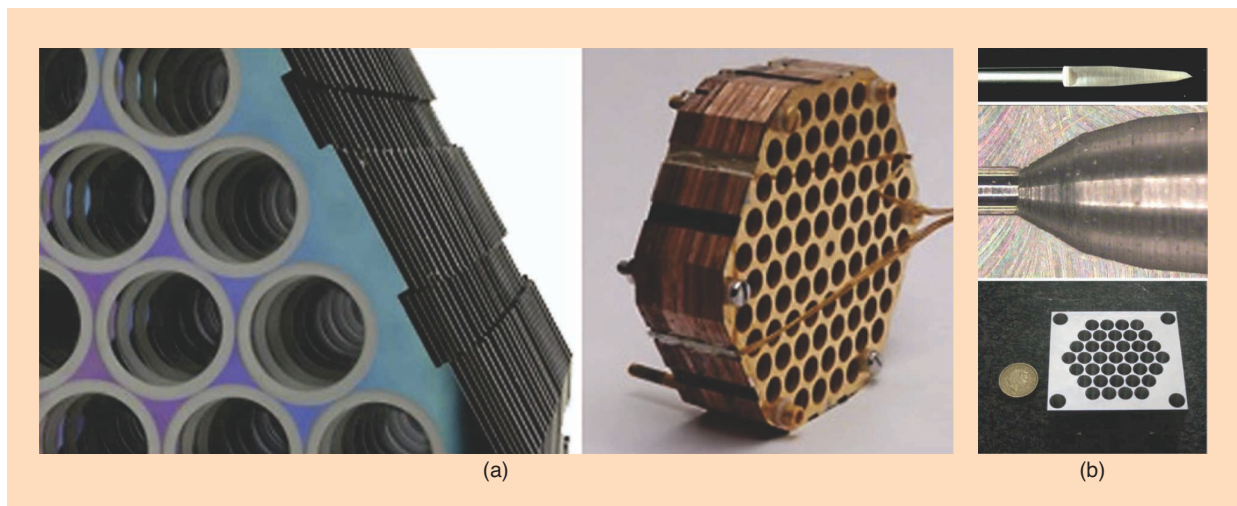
(a) A corrugated horn array fabricated using micromachining techniques at 150 GHz [57]. (b) A drill bit (top view), cross section (middle view), and array (bottom view), of a multiflare angle horn at 230 GHz.
